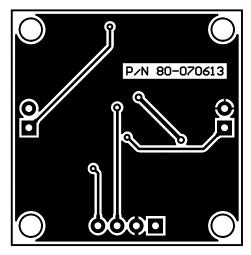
IR Distance Measuring Sensor Bottom PCB Layout
